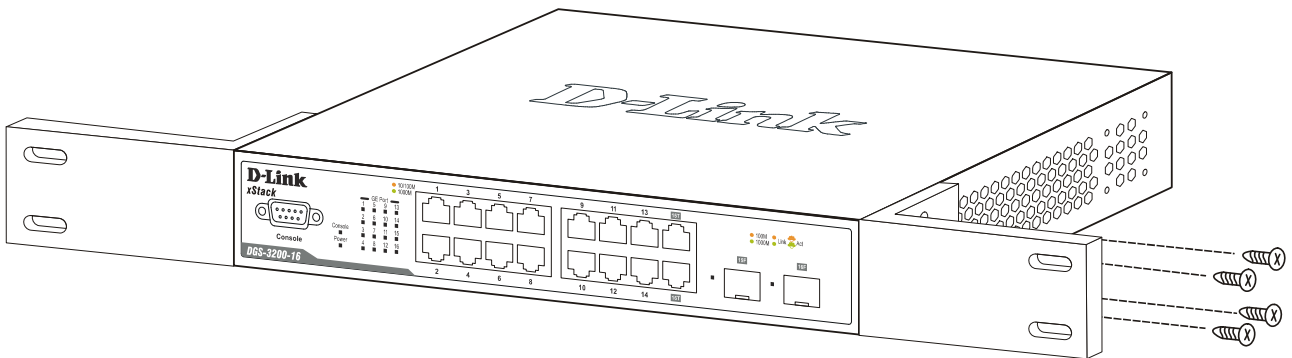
5. Fasten mounting brackets on the DGS-3200-16
